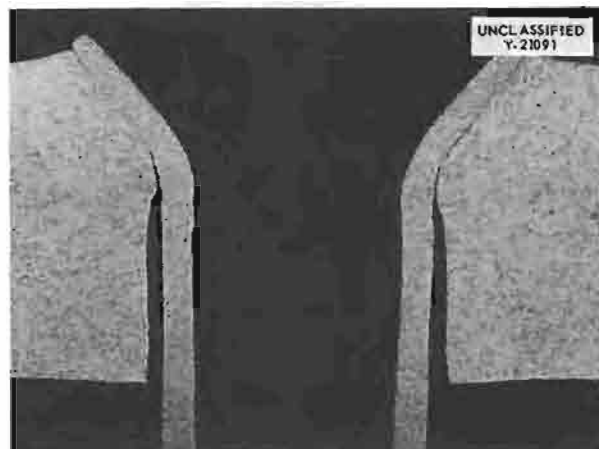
As-Received Recrystallized Tube-to-Header Weld Fabricated by Using a Prechamfer Method. Note large tube-to-header contact area. Etchant: 10% oxalic acid. 12X. Reduced 29.5%.
